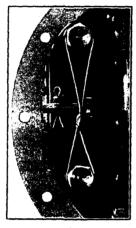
Correct Method of Wiring Ring Gear Bearing Cap Screws
